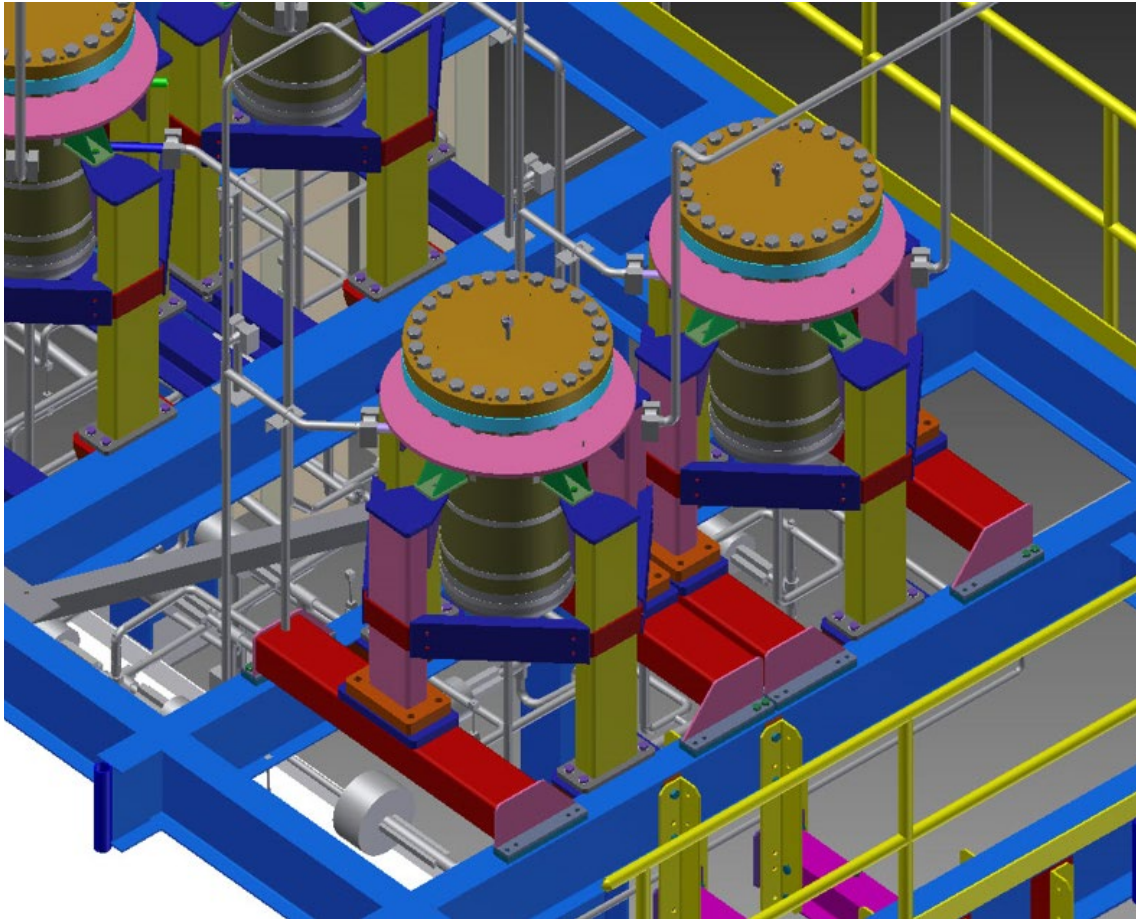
CAD of Test Vessels 7 & 8 Installation.
